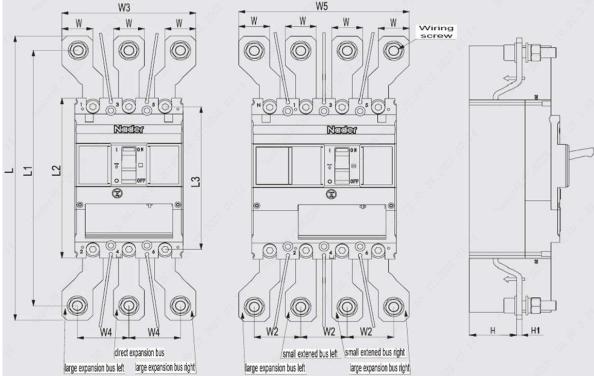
External Dimensions Of Extended Front-Panel Connection Products
